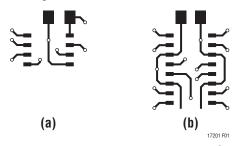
Typical Topside Metal for Multilayer PCB Layouts
